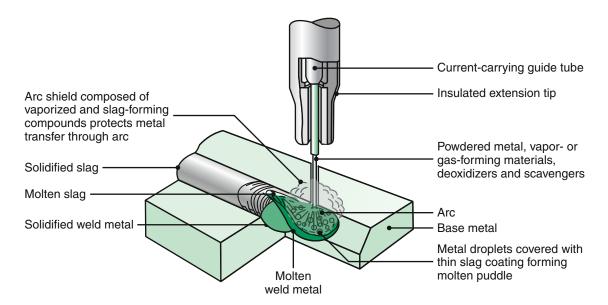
Schematic illustration of the flux-cored arc-welding process. This operation is similar to gas metal-arc welding, shown in Fig. 30.10.
